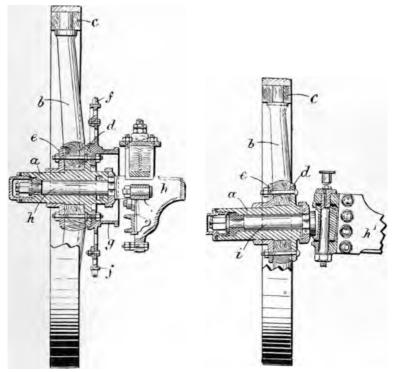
Weidknecht steam omnibus. Part sectional view of rear or driving wheel and axle.
